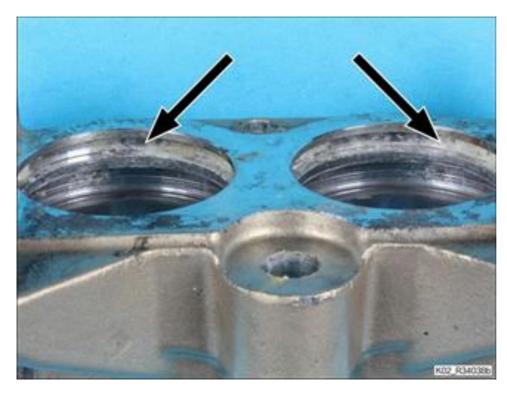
Base of the groove (arrows) of the front dust scraper ring with existing corrosion
